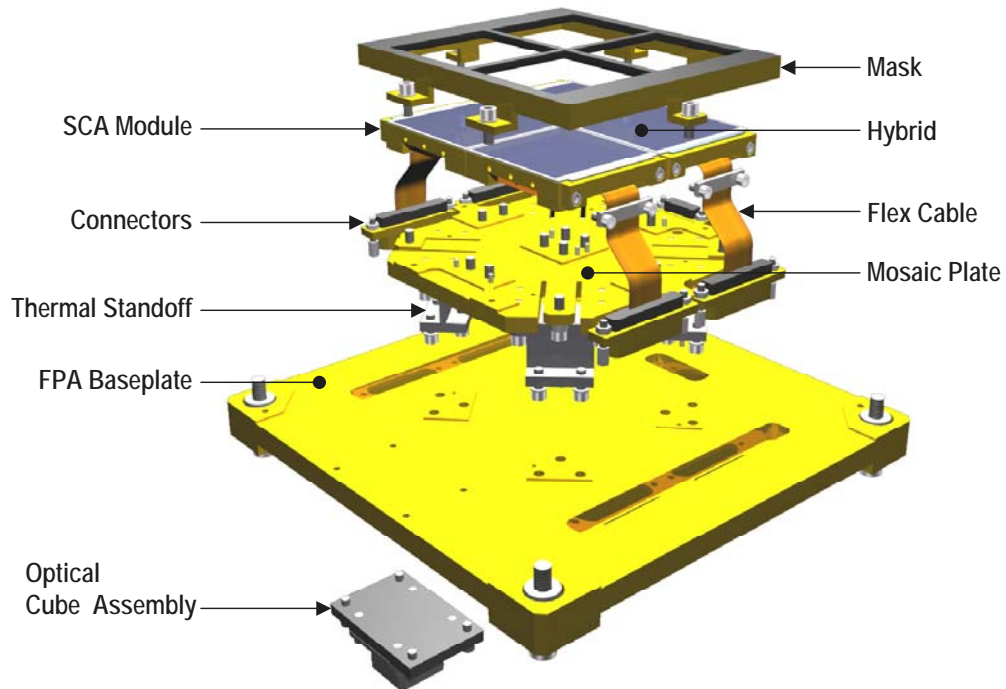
Exploded view of the 2x2 SCA FPA — giving a better view of the constituent parts.
